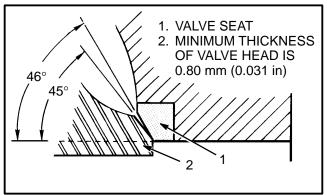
VALVE SEAT SPECIFICATIONS FOR INTAKE AND EXHAUST VALVES
